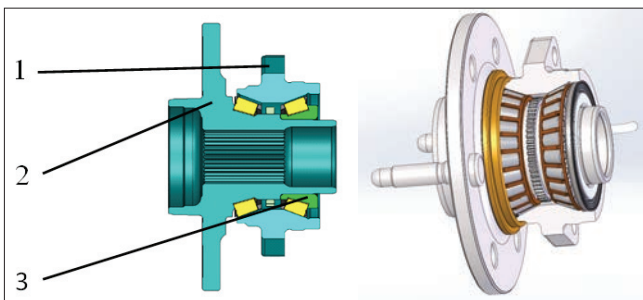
An example of a constructional solution for a road wheel bearing with a third generation hub bearing with the use of a tapered roller bearing: 1 – flanged outer ring, 2 – flanged inner ring, 3 – typical bearing inner ring
